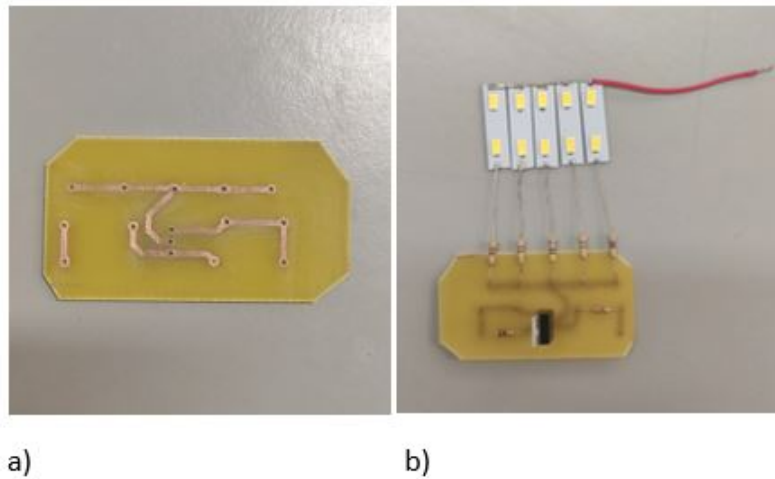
a) Printed circuit board b) Printed circuit board with welded components.
